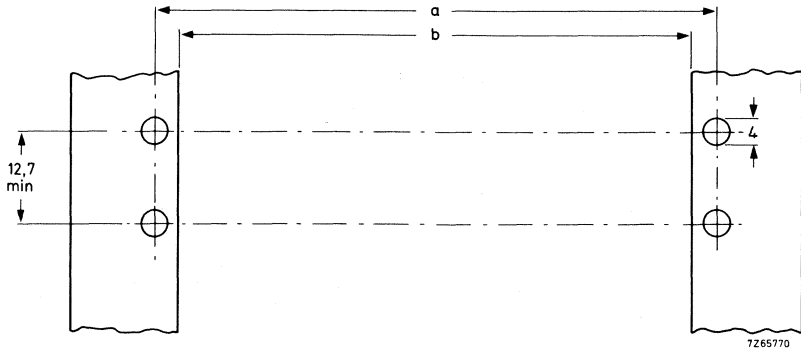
Rail mounting; see Table 3, for dimensions a and b.
